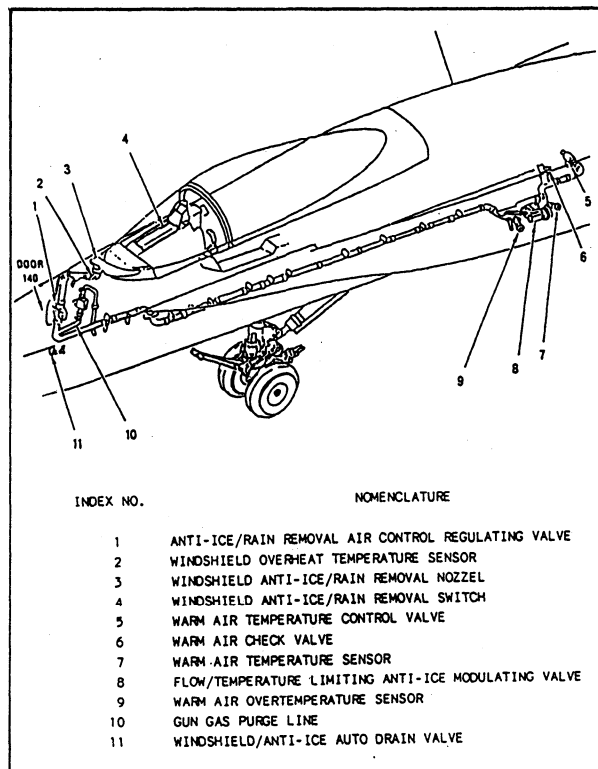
Windshield Anti-ice and rain removal system component locator.
